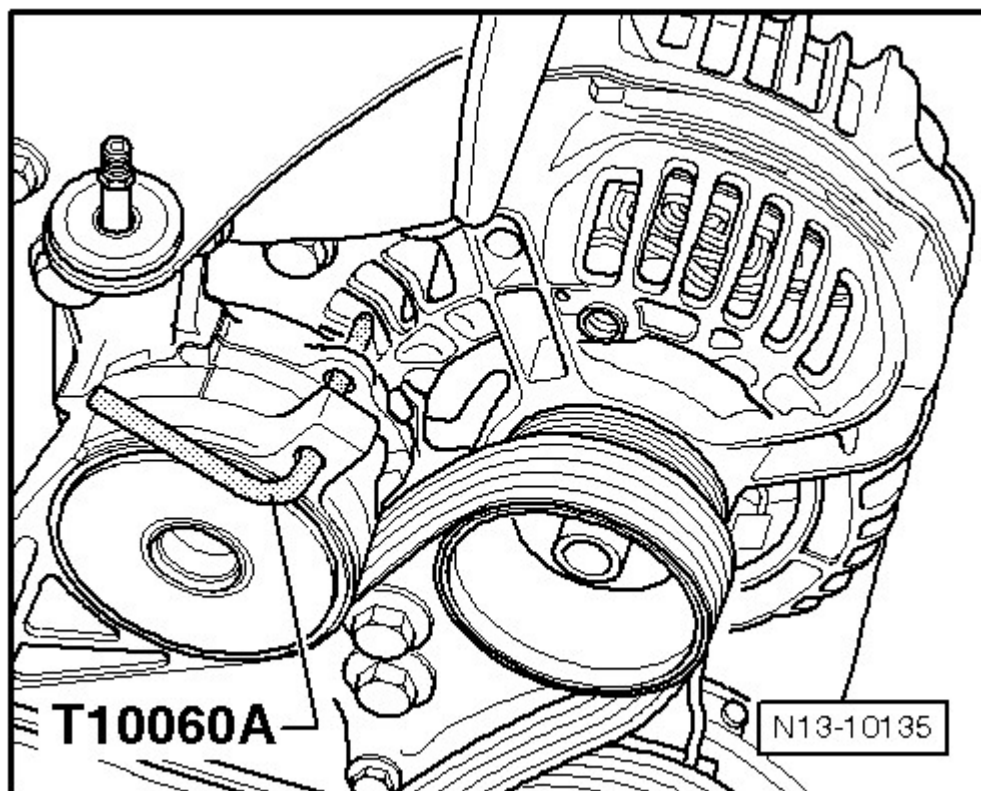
Identifying Lock Tensioner With Locking Pin T10060 A
